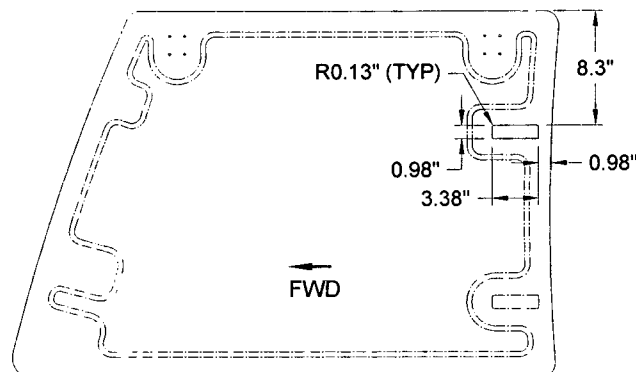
(b). D3186-2 SPACEPOD DOOR LATCH CUTOUT
